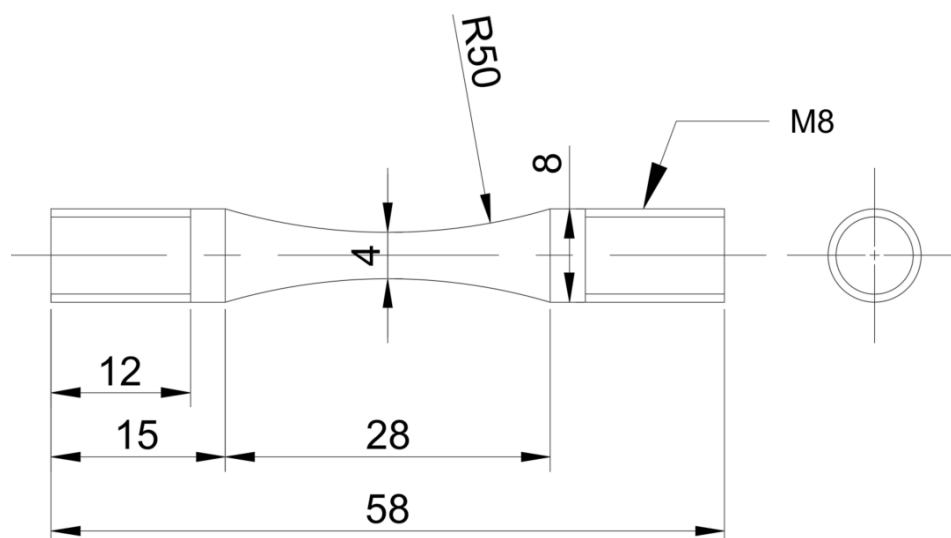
Diagram of the “hourglass” type specimens used for SSRT testing (dimensions in mm).
